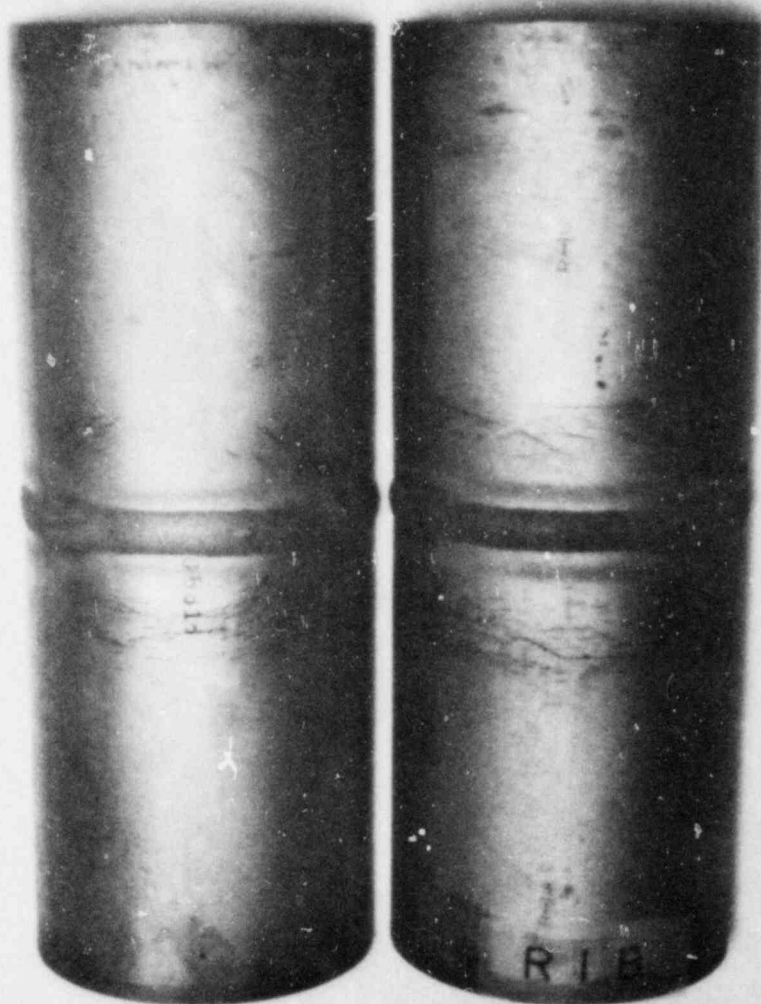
CRACK PATTERN OF 4 IN. SS PIPE WELD SPECIMEN (WITH HFIH)
